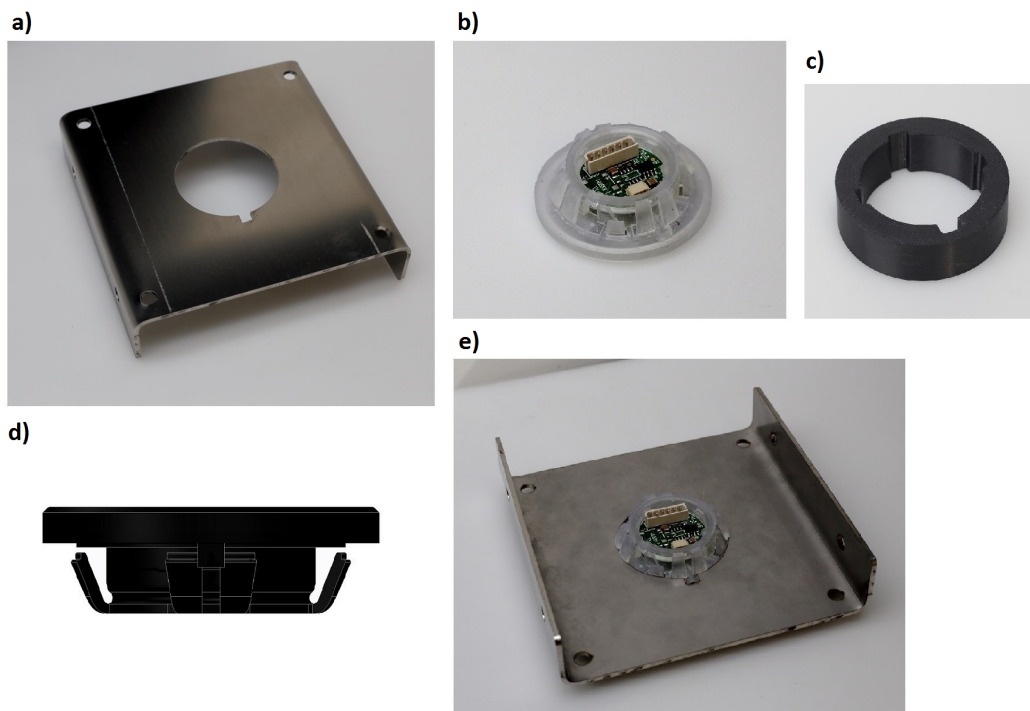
Prototypes for the *panel fastening interface*: a) a stainless steel installation plate, b) an assembled button from the rear, c) a disassembly tool, d) a side view of the radial snap-fits, and e) an installed button.
